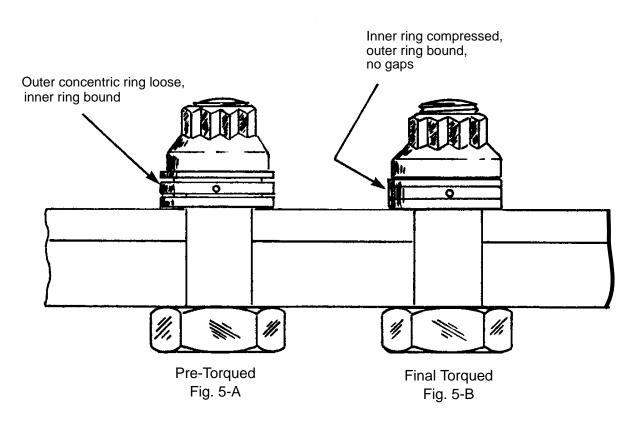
Torquing PLI Washer/Bolt Assemblies
